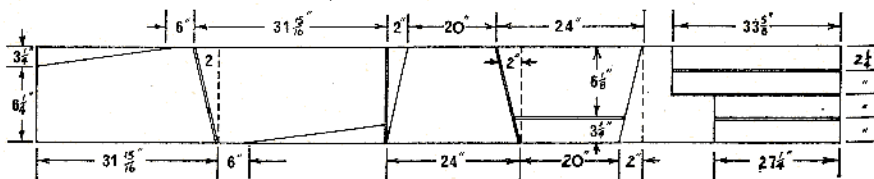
Layout of the components used for making the wood frame of the solar extractor.
